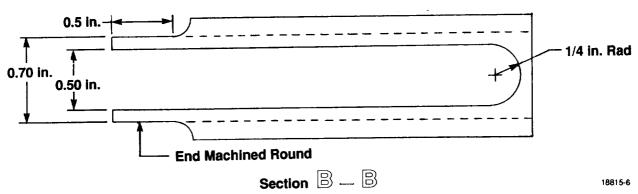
Section B–B From Figure 6b. After Green Bonding of Manifold Stack, Manifold Tubes are Machined Into Stack, the Ends Machined Round and Parts Fired
